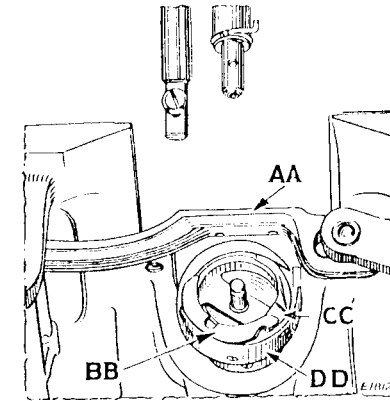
Showing Correct Position of Thread Guard (DD) and Bobbin Case Holder (BB) for Removal of Sewing Hook
